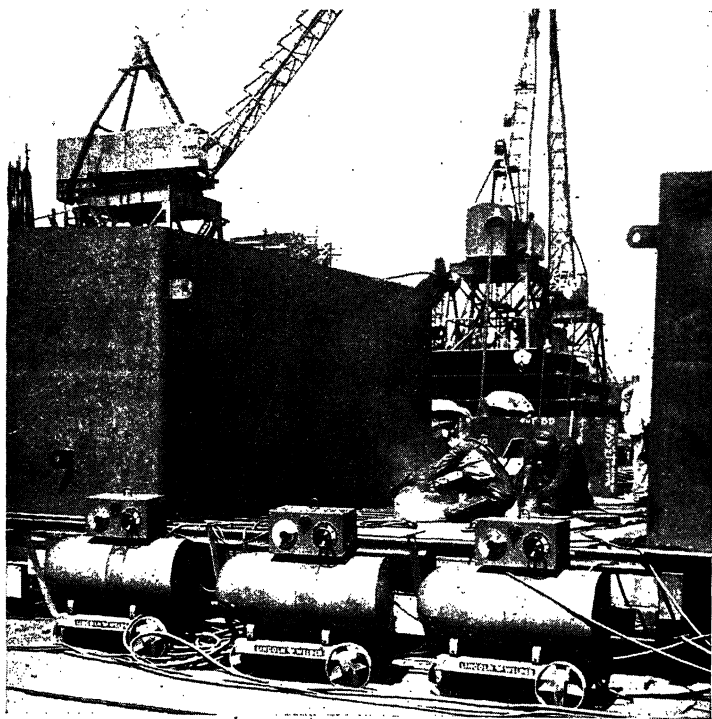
Electrically driven arc-welding generators at work in a west coast shipyard. (Courtesy of Lincoln Electric Co.)
